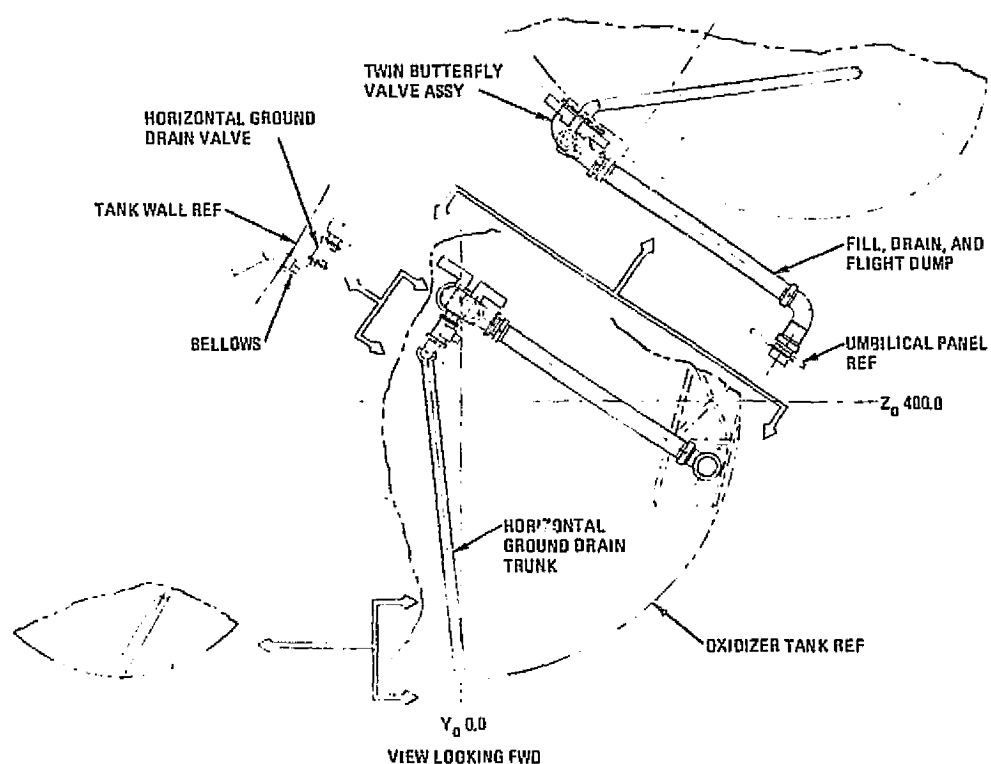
Oxidizer Fill, Drain, Flight Dump, and Horizontal Ground Drain Arrangement
